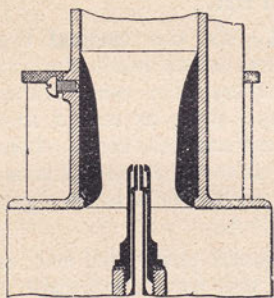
Section showing position of choke tube in vertical Carburetters.
